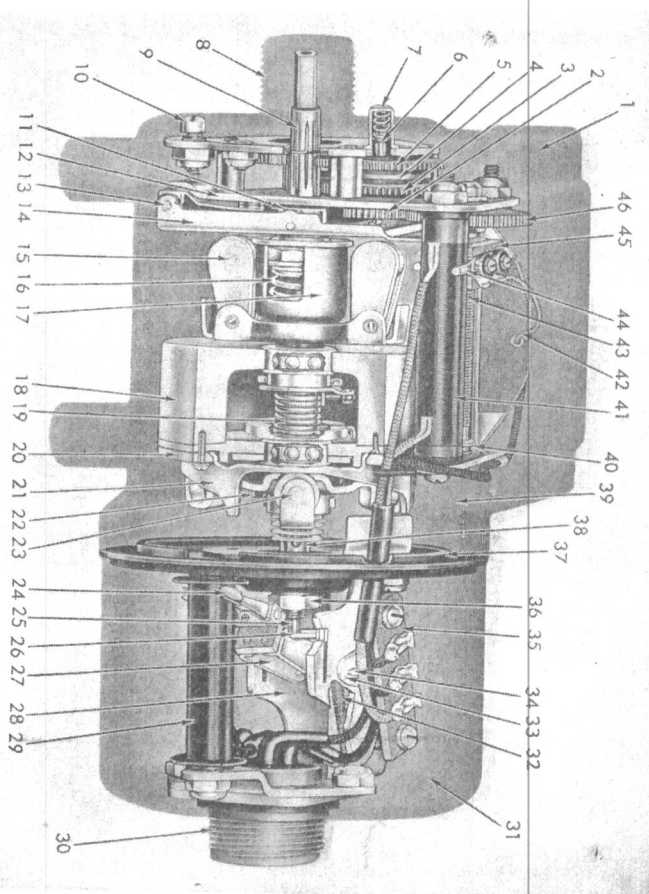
A phantom view of the turbo-governor. (1) Housing cover plate; (2) clutch bar; (3) counter-clockwise drive gear; (4) clutch disk; (5) clockwise drive gear; (6) clutch-disk shaft; (7) clutch spring; (8) threaded connector; (9) splined governor shaft; (10) clutch-lever adjusting screw; (11) thrust collar; (12) mounting bracket; (13) clutch-ver pivot; (14) clutch lever; (15) flyball weight; (16) governor spring; (17) spring urel; (18) inertia rotor; (19) torque spring; (20) locking plate; (21) cam plate; (22) ide; (23) cam-roller assembly; (24) potentiometer wiper; (25) push rod; (26) cross-ad; (27) wiper arm; (28) frame assembly; (29) potentiometer winding; (30) connector; (31) accelerator cover; (32) return spring; (33) fulcrum adjustment; (34) wiper-arm vot; (35) terminal block; (36) nut on governor shaft; (37) bearing plate; (38) governor aft; (39) governor housing; (40) declutching extension arm; (41) potentiometer wind-
